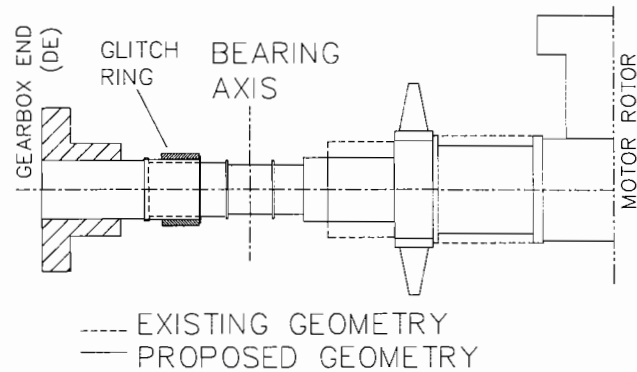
Old Vs New Motor Shaft Geometry at Gearbox End (DE).
